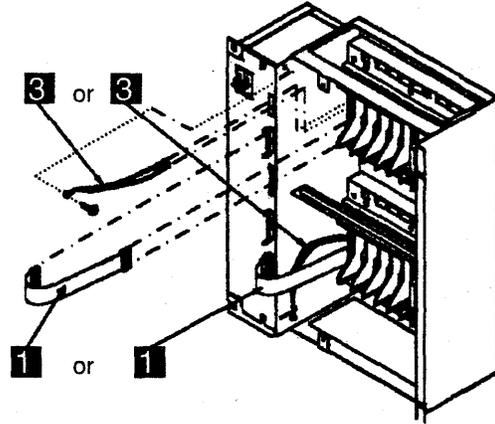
LIC Board Type 2 Enclosure Assembly
